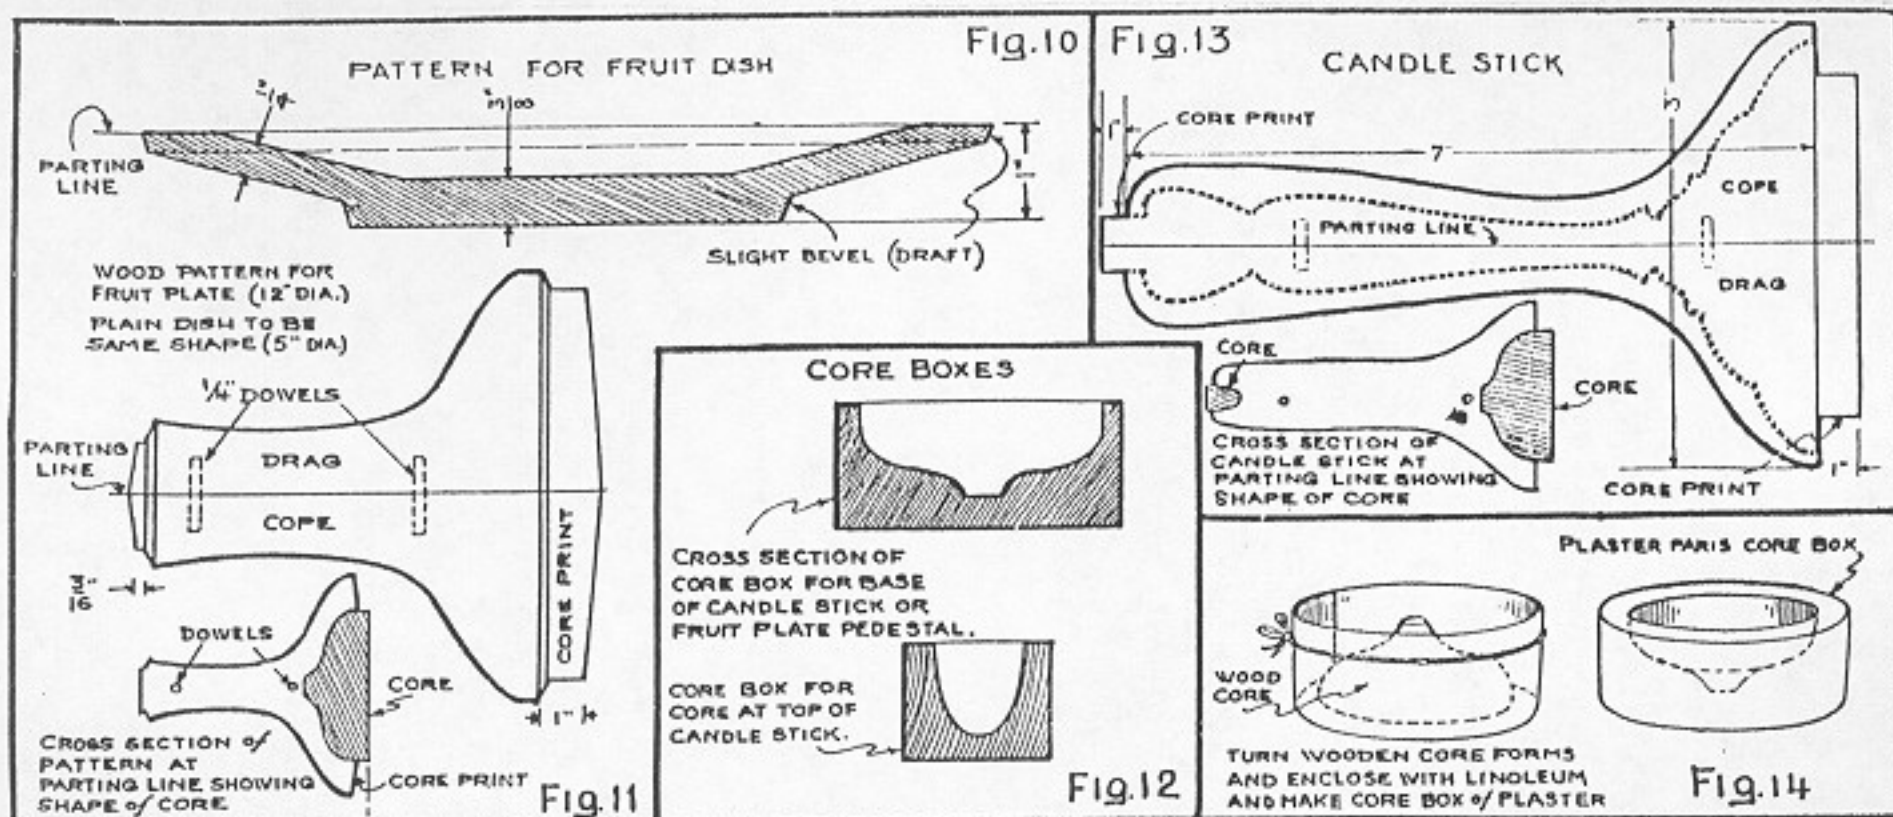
, shows a cross section of the tray pattern. This same pattern in larger size serves for the fruit dish. It is made of pattern pine which is a soft, straight-grained white pine. The diameter of the stock as well as its thickness will depend on the size of the dish or tray that is to be made. The sketch shows the thickness of the wood pattern after it has been turned on the lathe. It should be noted that none of the vertical sides of the pattern is at right angles to the parting line. These sides should be tapered a little as shown. In pattern-making this slant is known as draft and must be on every pattern in order that it may be removed from the sand without breaking the mold. The pattern should be finished smooth with sandpaper and coated with shellac. Allowance for shrinkage is unnecessary because the exact size of projects of this kind is not important.
